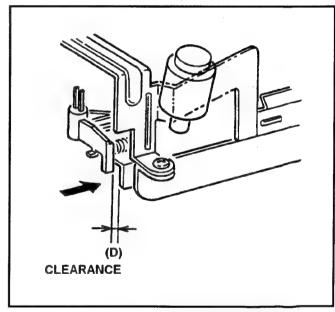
Cleaner Solenoid Position Adjustrment
